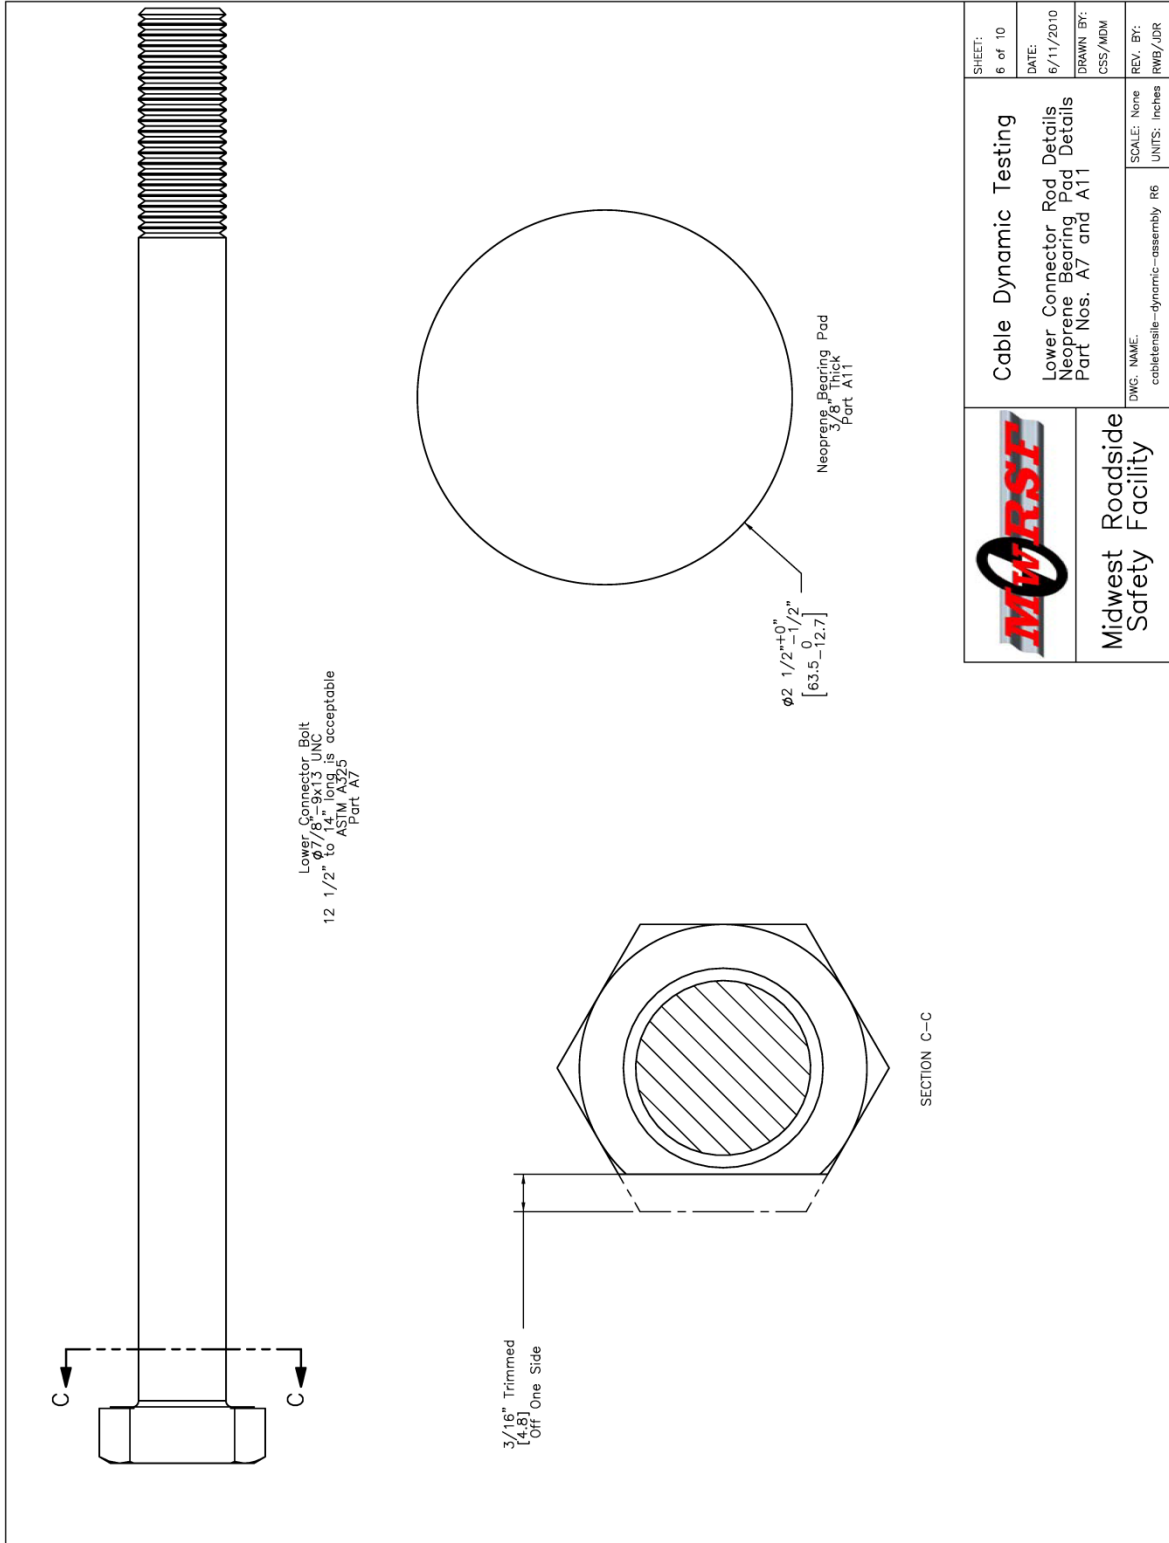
Lower Connector Rod and Neoprene Bearing Pad Details
